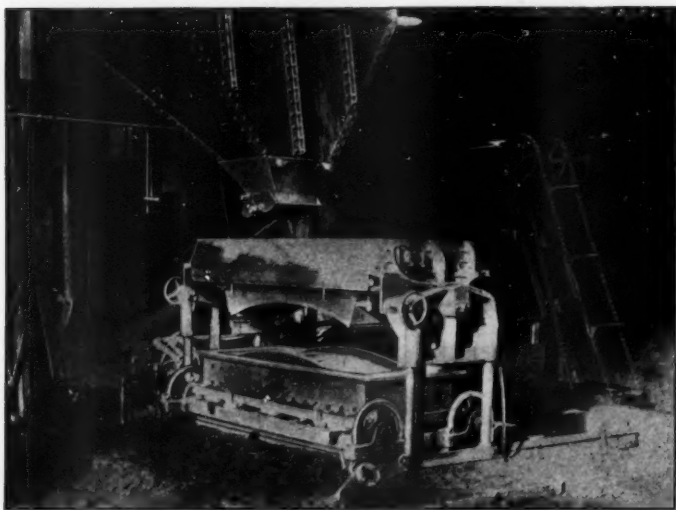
MACHINE WITH MOLD ROLLED-OVER AND PATTERN DRAWN
